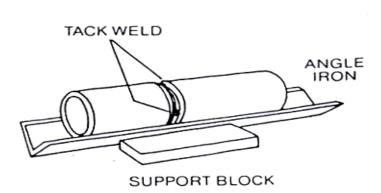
A simple angle iron with back supports makes a good welding jig for joining a few pipe sections together.
